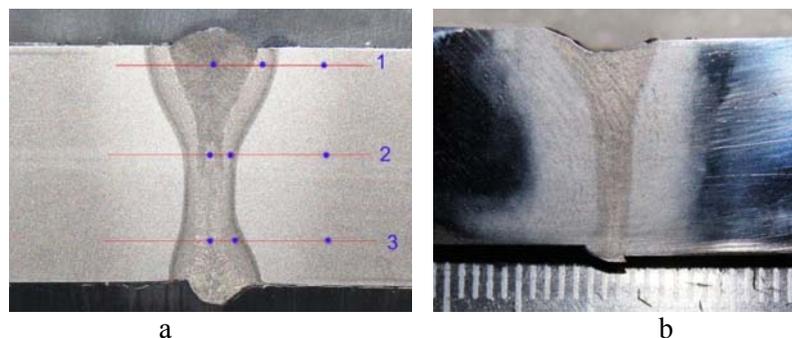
Cross macrosection of the welds: a - Hardox 450; b - Hardox 400.
